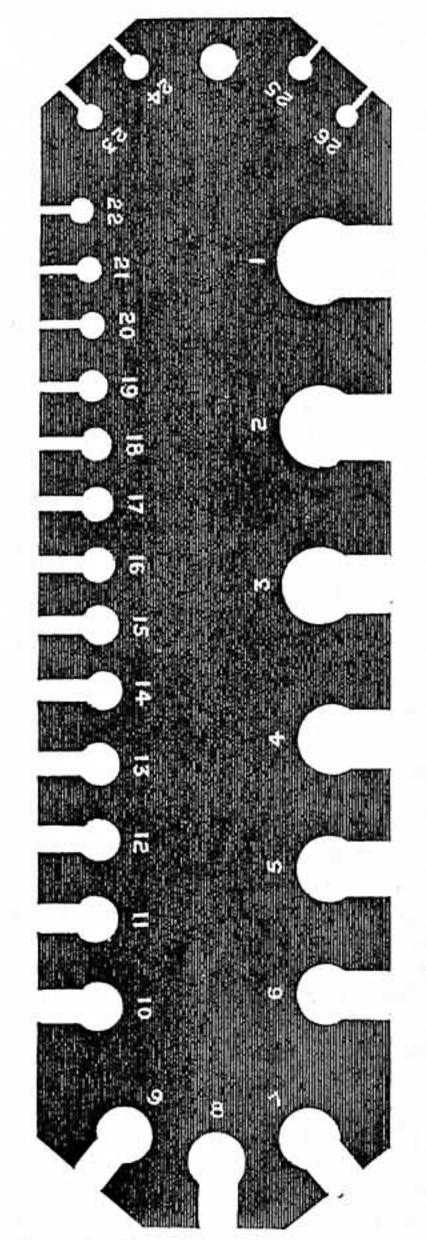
The Birmingham Wire Gauge (B.W.G.).
